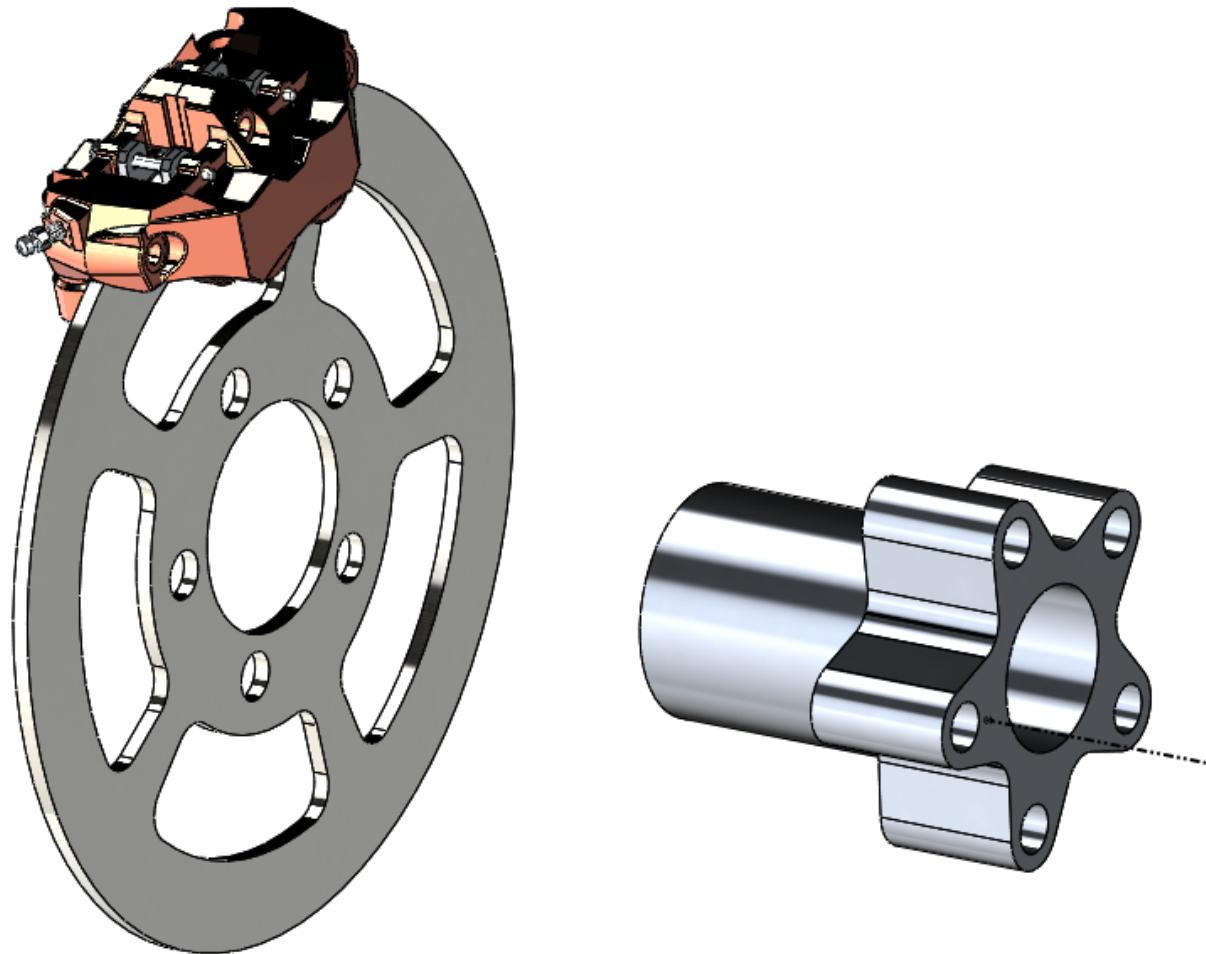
Hirani, Asimm: Assembly Step 3
